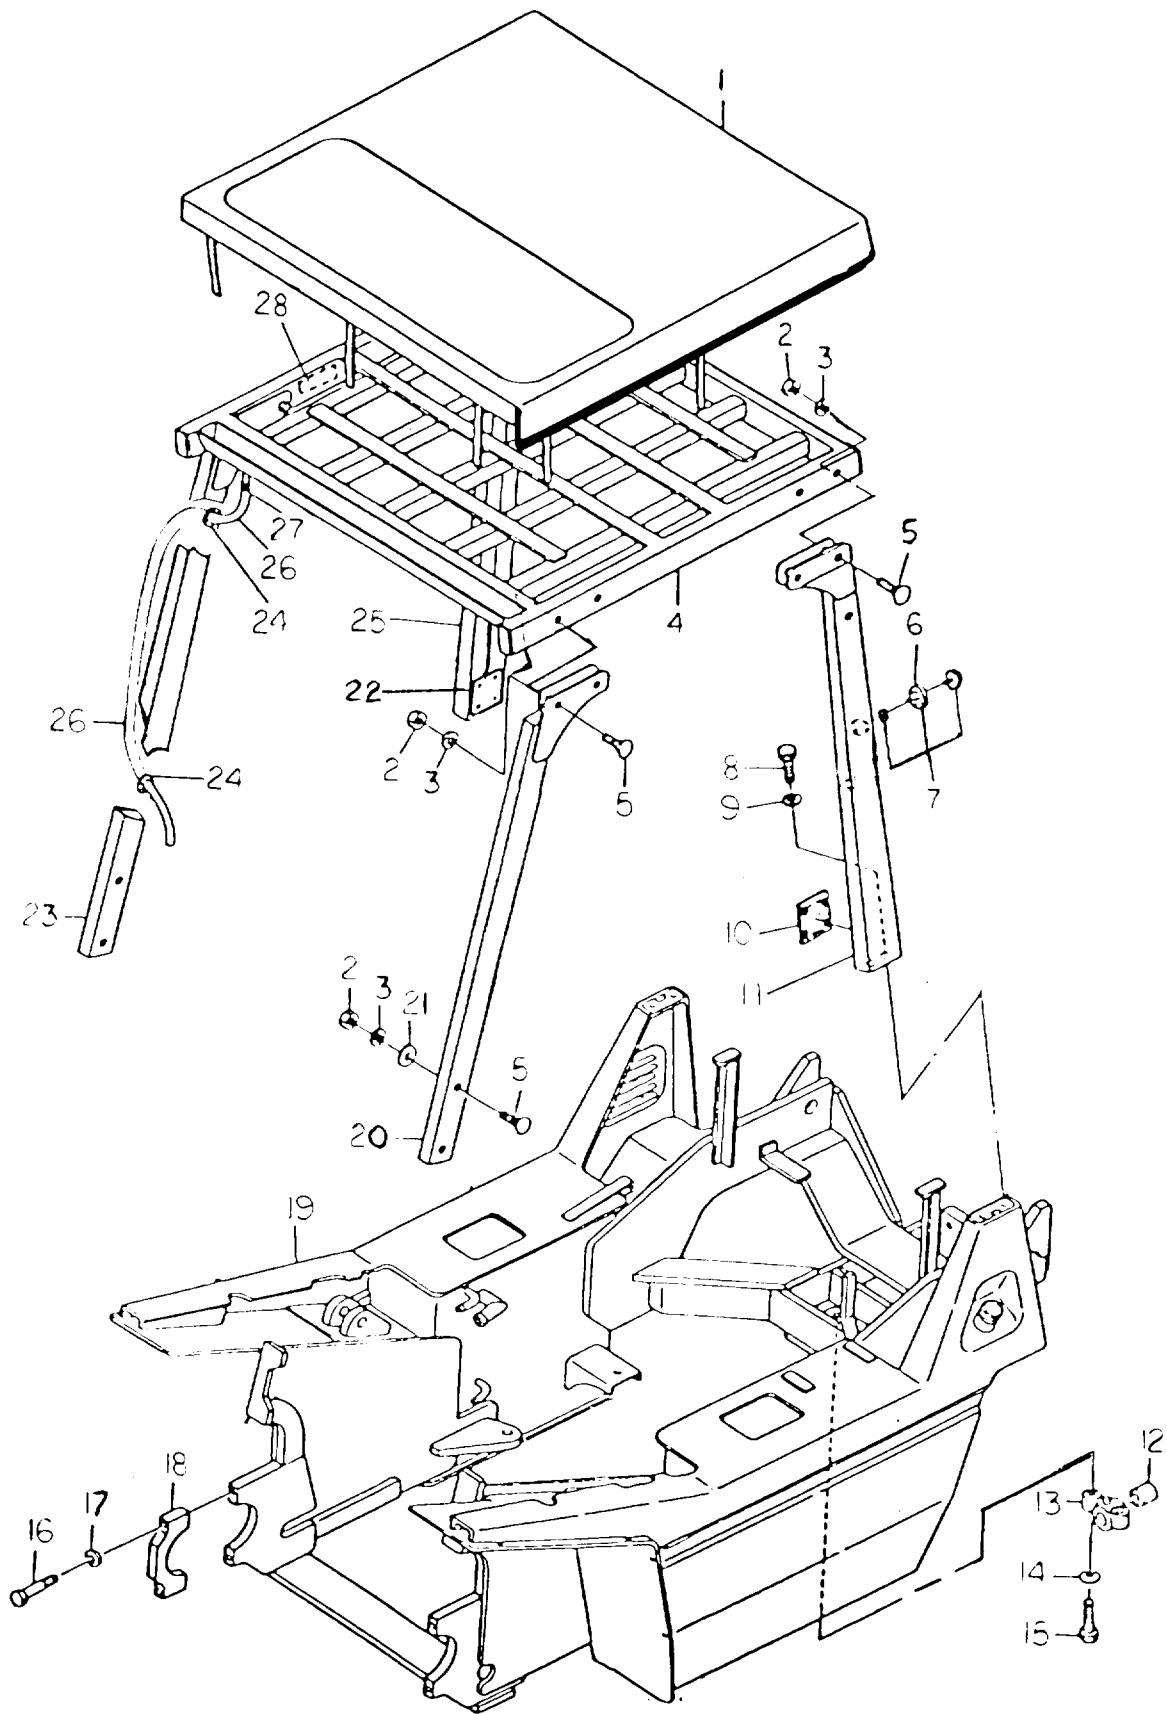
FRAME AND OVERHEAD GUARD ASSEMBLY
